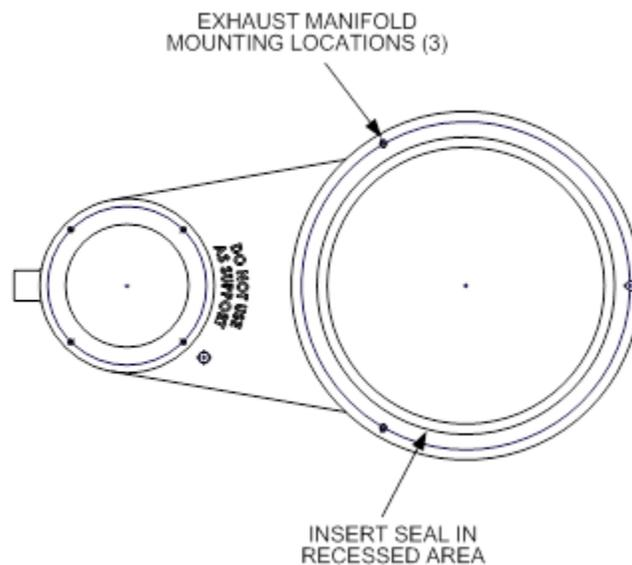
Benchmark 1.5LN Exhaust Manifold - Top View
